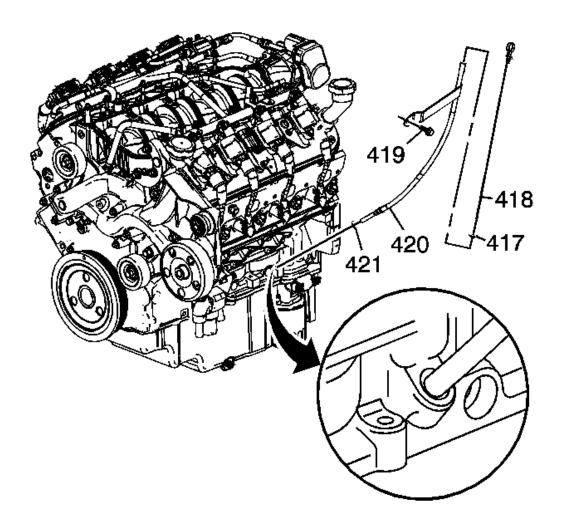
View Of Oil Level Indicator & Tube Courtesy of GENERAL MOTORS CORP.
